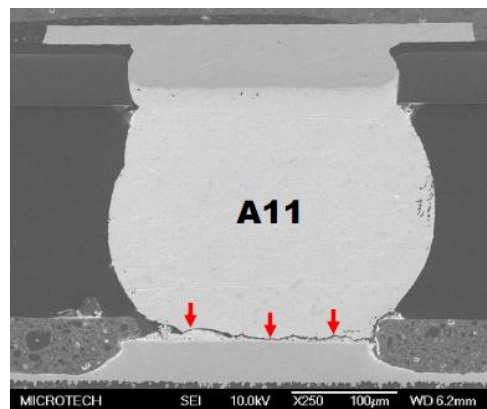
Solder Joint Failure occurred on the PCB side
